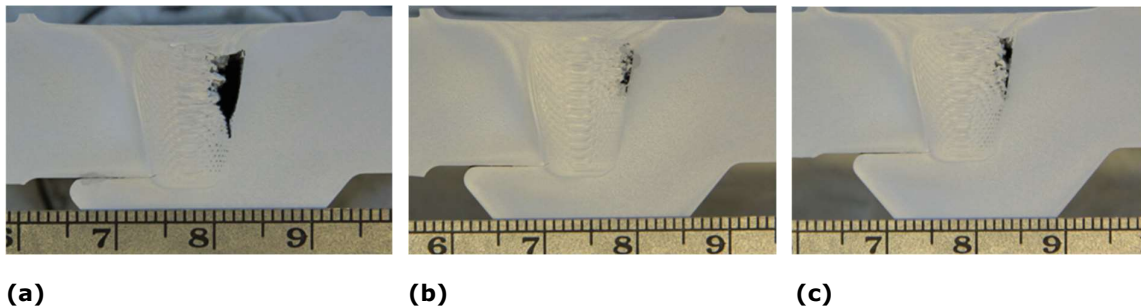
3_Gap_17mm weld macrography at (a) start, (b) middle, and (c) end
